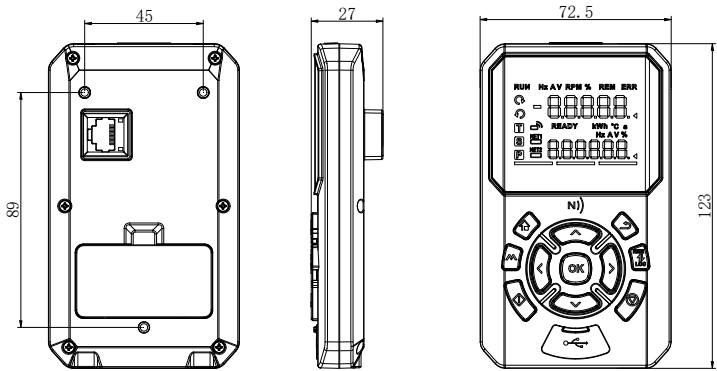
MV820-DP03 appearance and mounting dimensions (unit: mm)
